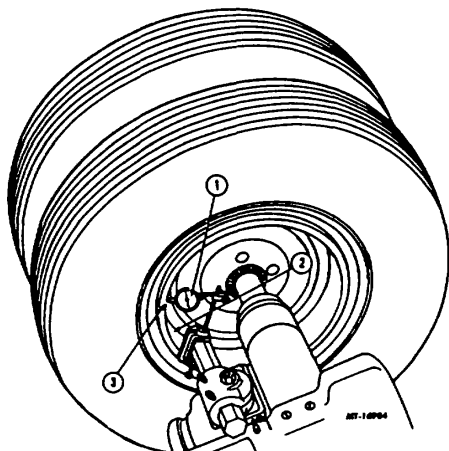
Checking Drum Runout On Brake Drum Lathe
